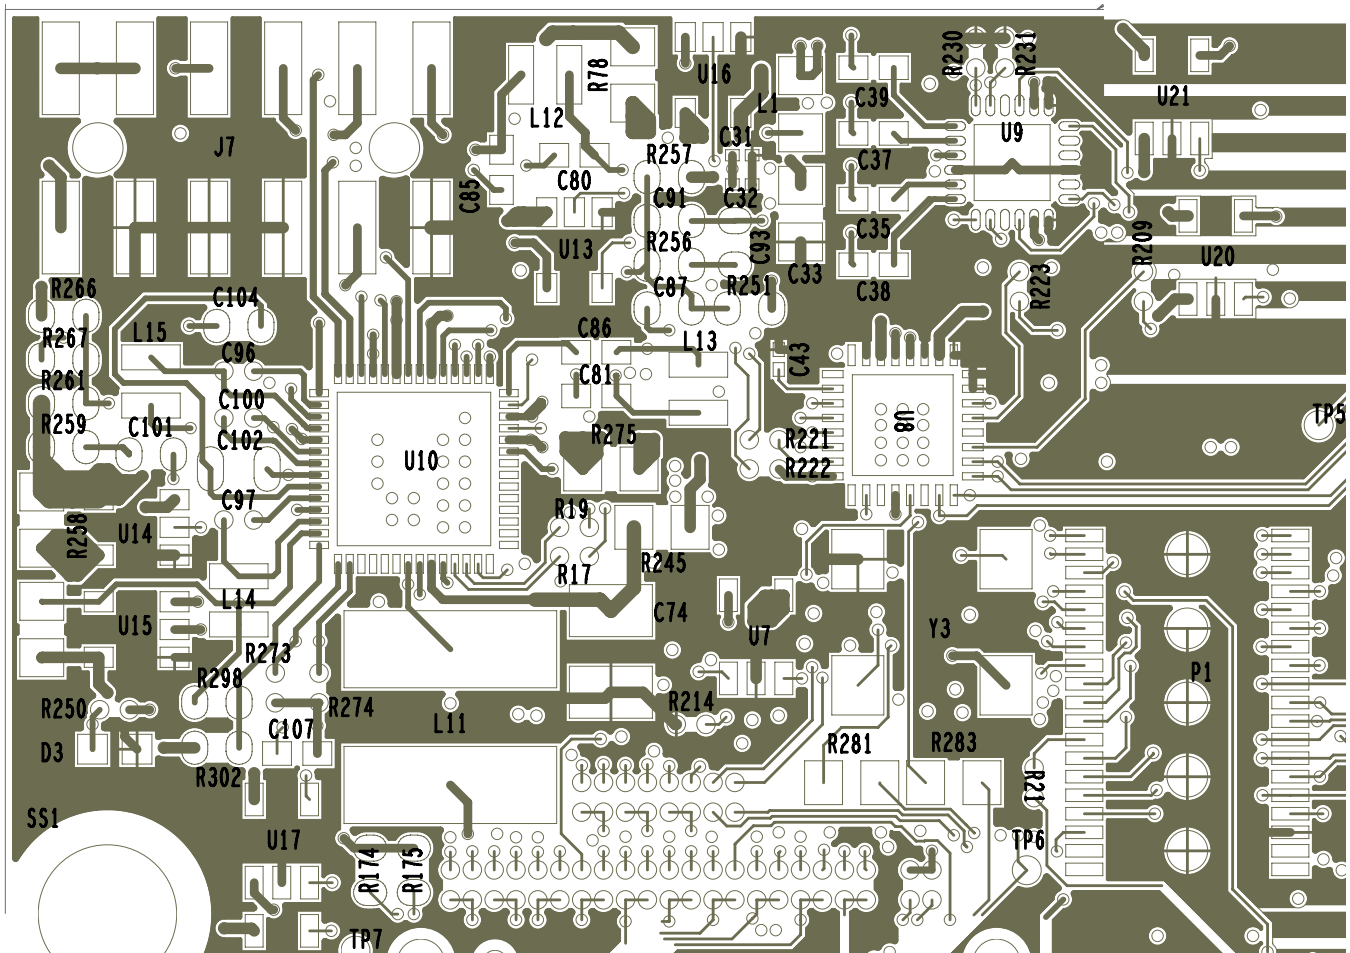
MC34704 Top Layer PCB Layout Implementation.
